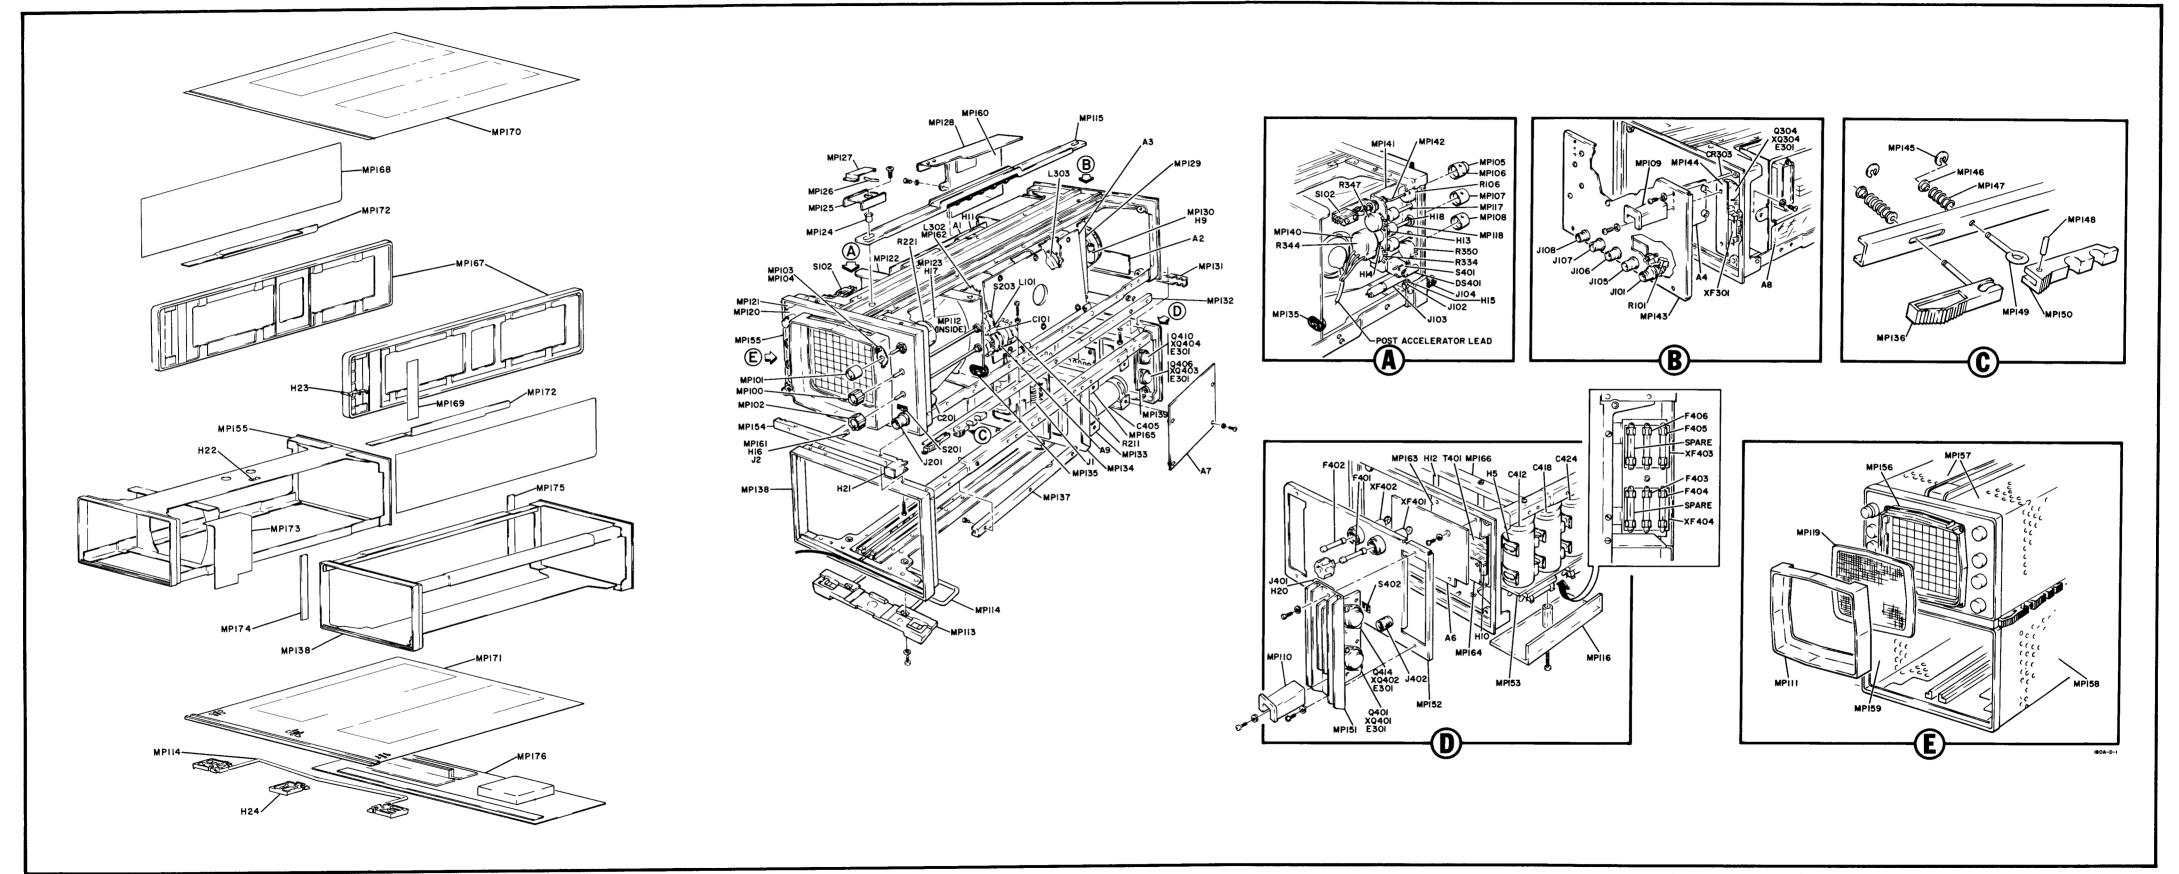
Model 180A/AR Mechanical Parts Identification
